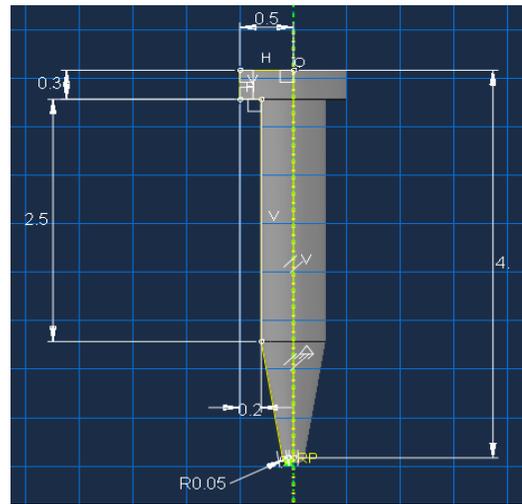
Front view of indenter (All Dimensions in Centimeters)
